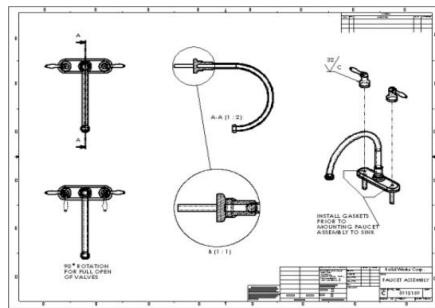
SOLIDWORKS 2D drawing generated from 3D model
